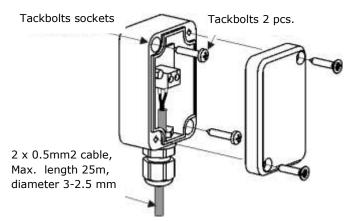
Connecting CT4-P weather sensor; it is not a standard regulator equipment.
